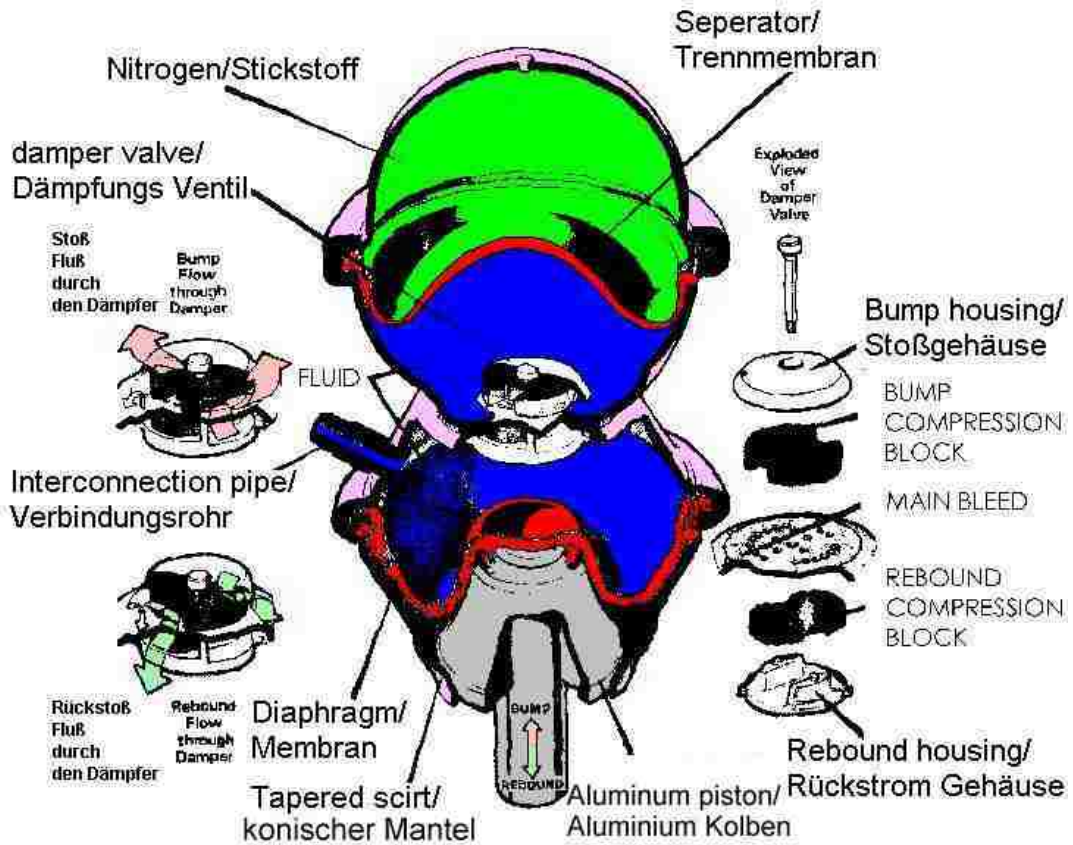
Cutaway of Hydragas suspension unit (reproduced from Moulton[?])
